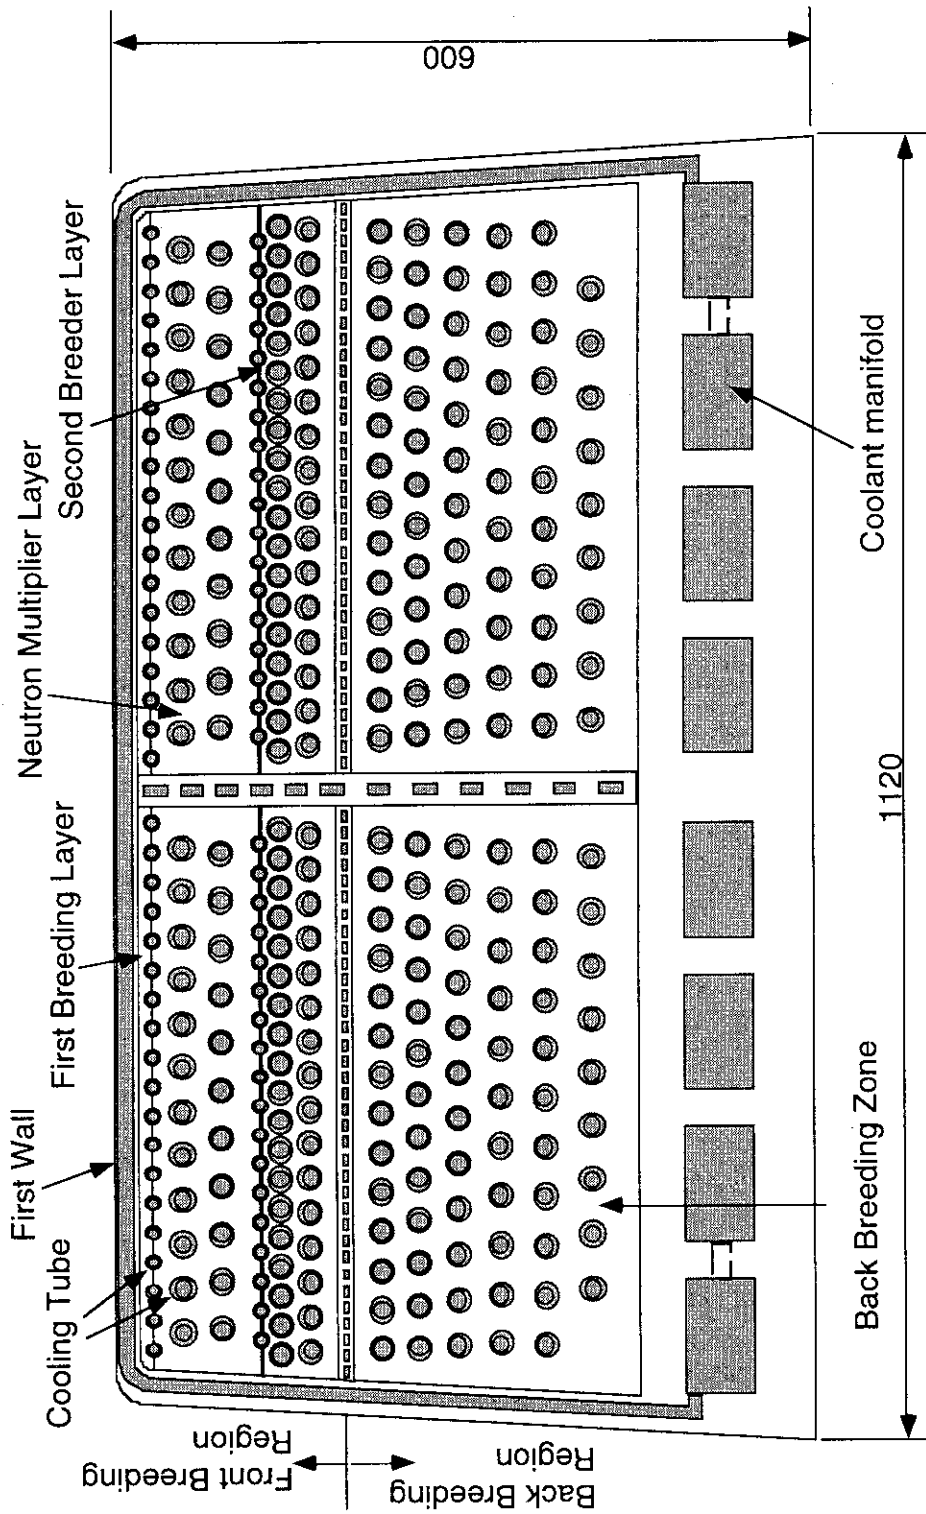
Cross-sectional view of Helium-cooled test module
